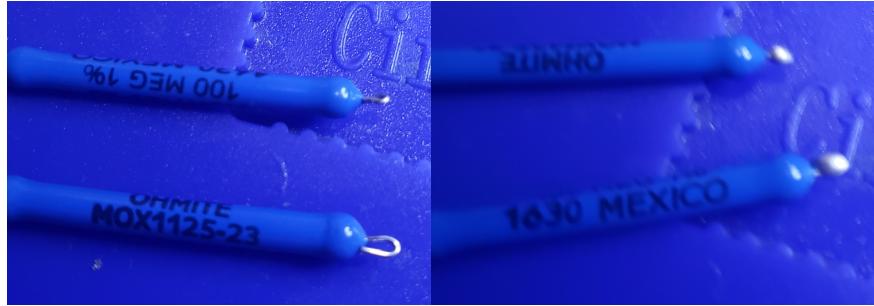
Left: loop on resistor lead to easily hold a ball of solder.
